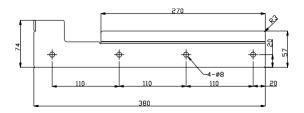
Dimensions of rear panel of R6-15K/17K/20K/22K/25K-T2-32 R6-5K/6K/8K/10K/15K-T2-32-LV
